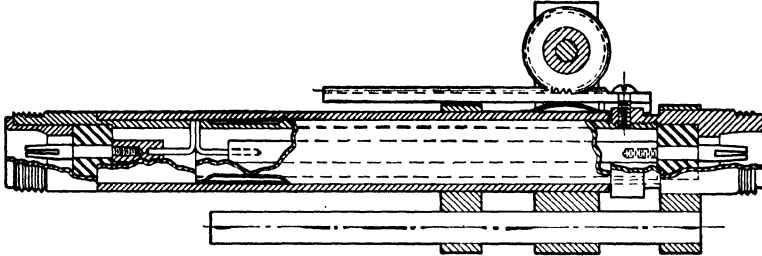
Assembly sketch of the TPS-15 cutoff attenuator.
